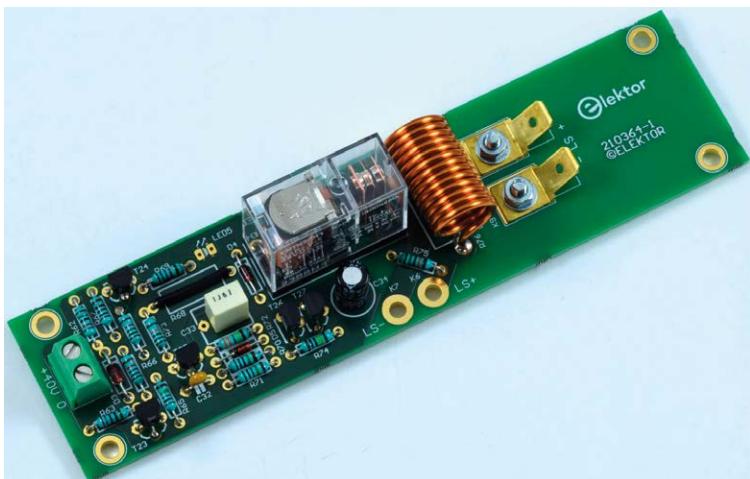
The completed protection board (PCB 210364-1 v1.1 shown).
